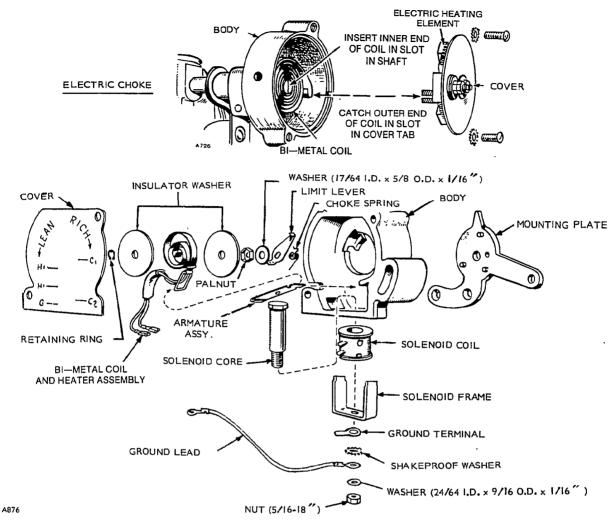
DISASSEMBLY OF ELECTRIC AND THERMO-ELECTRIC CHOKE
